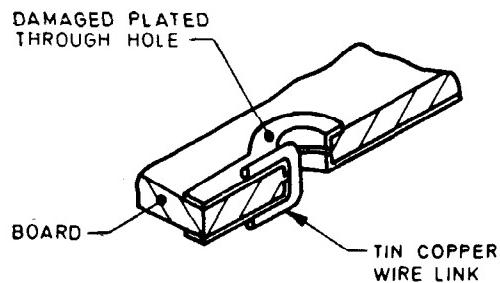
DEFECTIVE PLATED THROUGH HOLE — WIRE LINK METHOD
